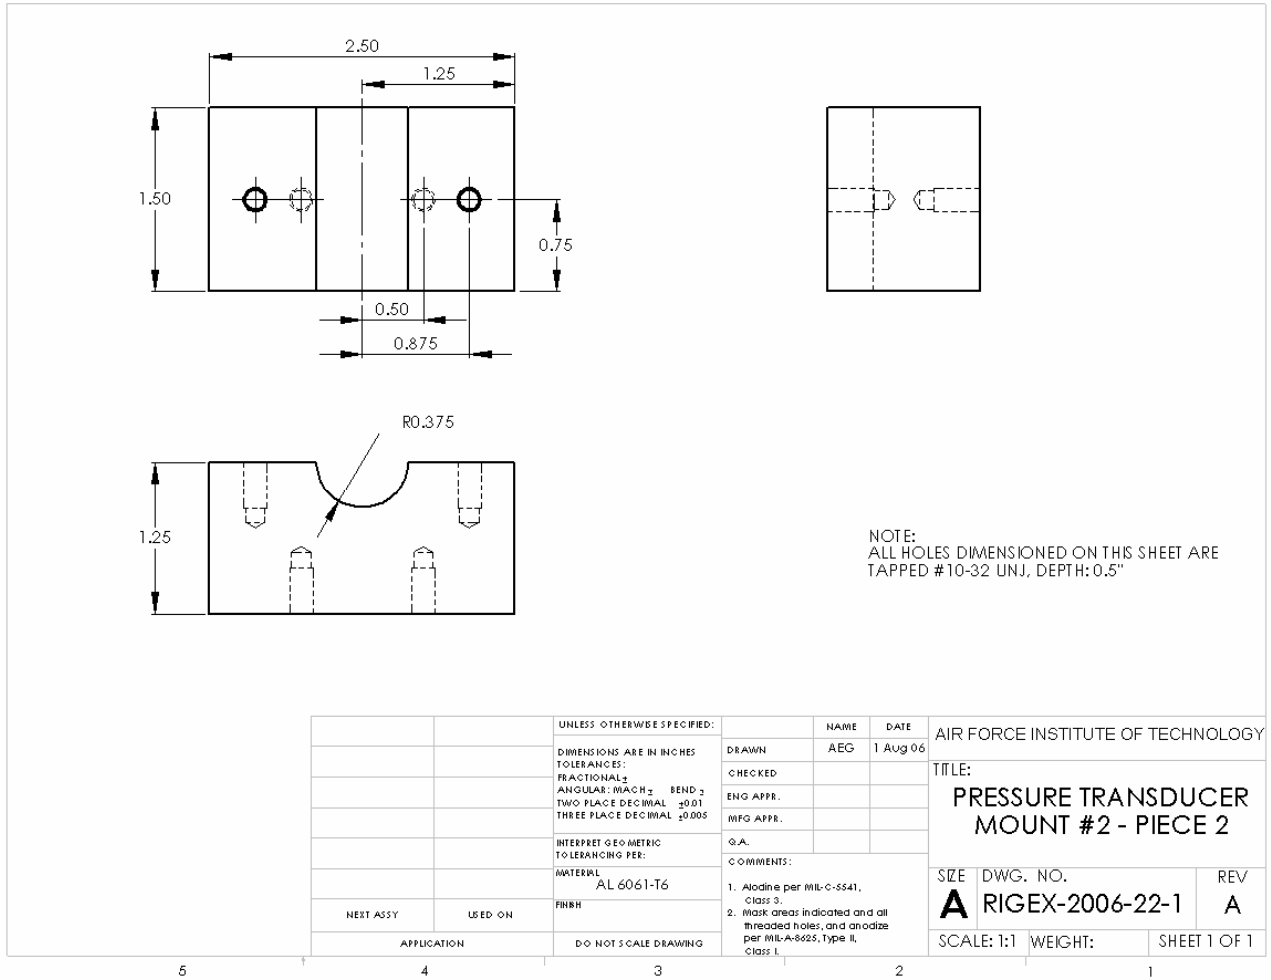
Nitrogen Tank Pressure Transducer Mounting Block Piece 2
